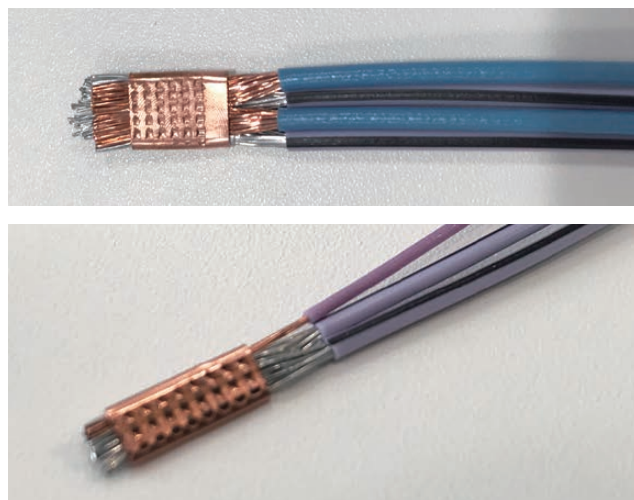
Welding joints between the aluminum wires and the copper ones.
